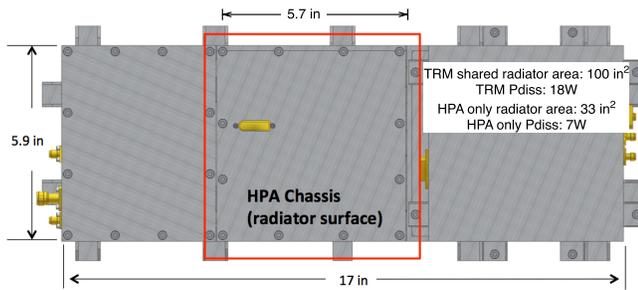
View of TRM from radiator surface showing radiator dimensions for the TRM and the HPA chassis.
